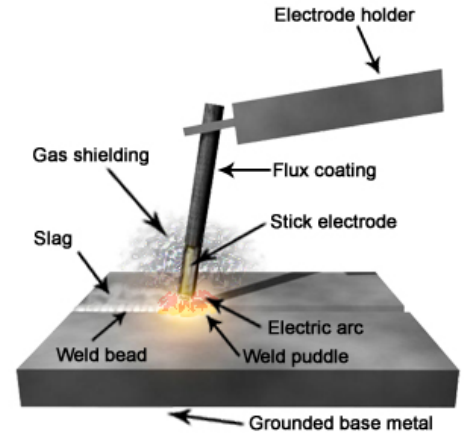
Flux creates a gaseous shield that protects the arc and weld puddle.
